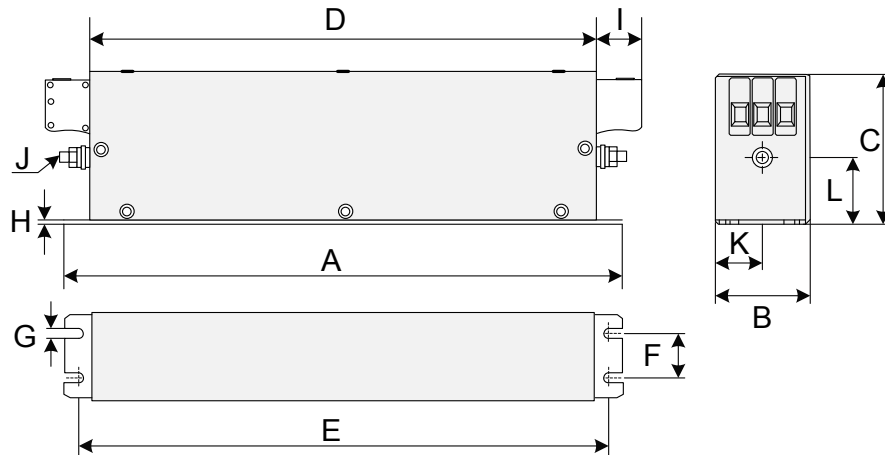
Dimensions of FN3258 series filters (7-180 A) (unit: mm)
